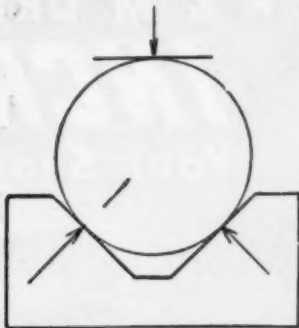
Scheme for a clamping design for cylindrical work pieces, usual design.
